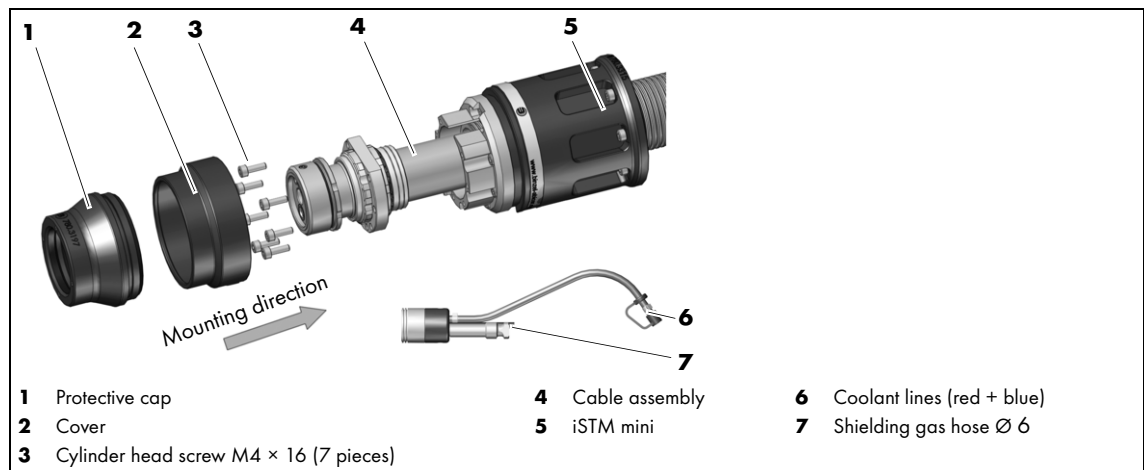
Mounting the cable assembly iSTM mini for ABIROB® W
